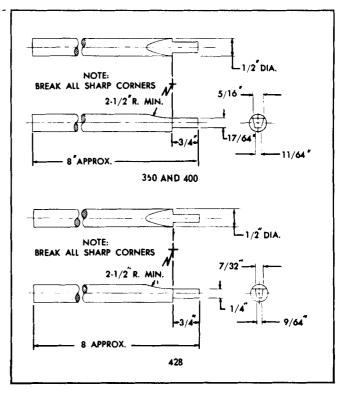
Upper Rear Main Bearing Seal Tool
